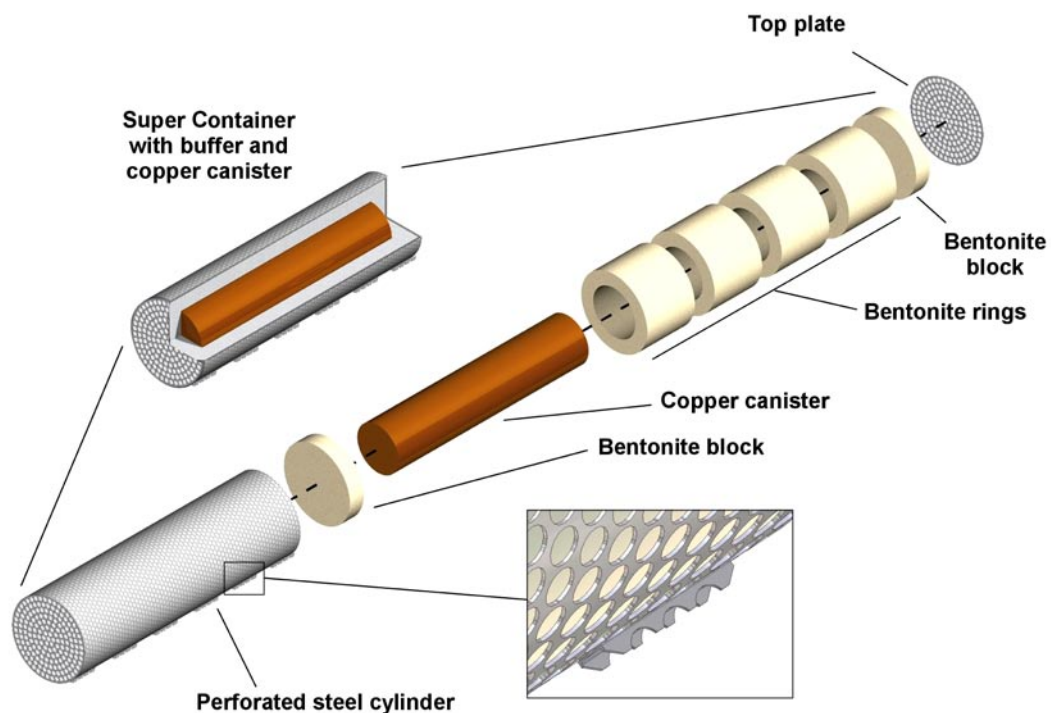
Super container consisting of one copper canister, buffer material and a perforated steel shell.
